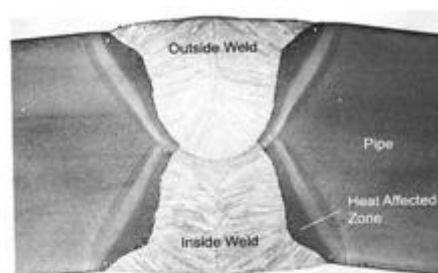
Welding metallography at the top edge of the plate.
